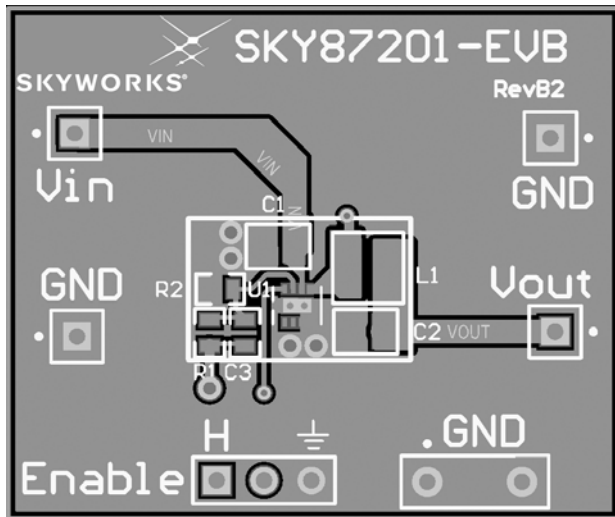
SKY87201-11 Evaluation Board Component Side Layout
